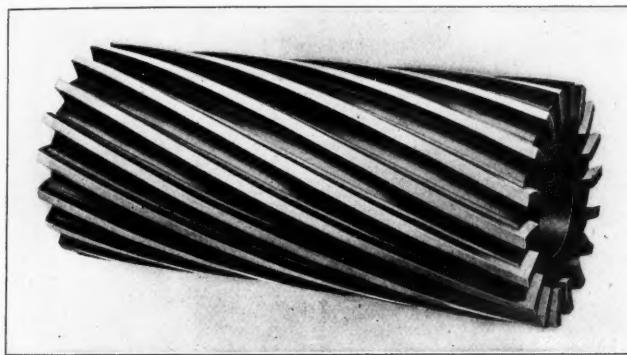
Inserted Blade High-speed Milling Cutter with Helically-bent Blades.
